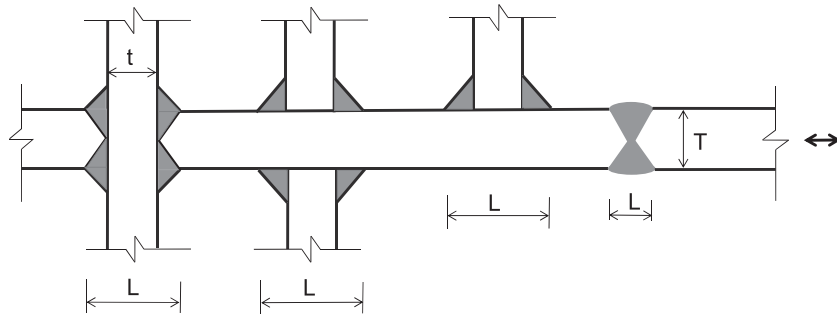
Illustration of different types of welded cruciform joints and butt weld.
